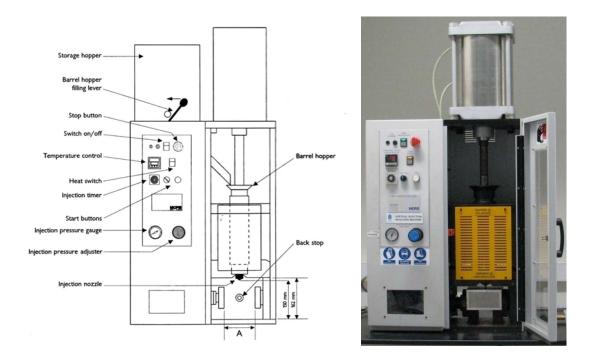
Vertical Injection Moulding Machine MTT Model 100KSA
